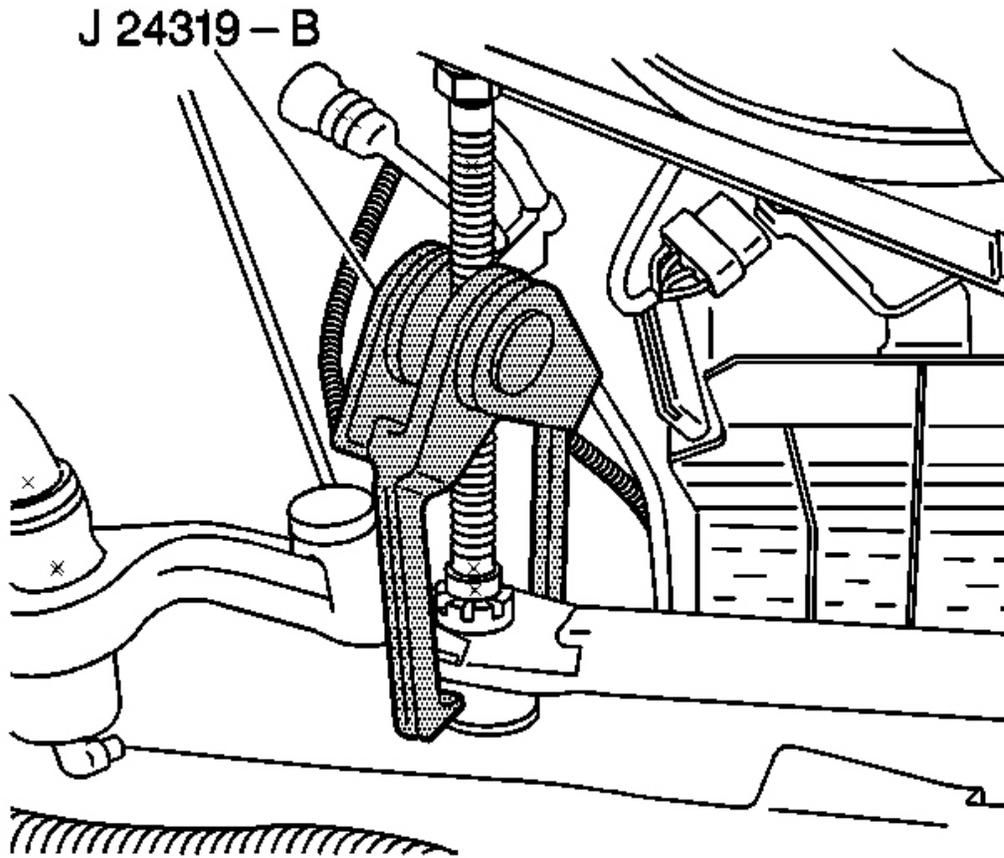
Removing Steering Damper Ball Stud From Relay Rod Using J 24319-B
